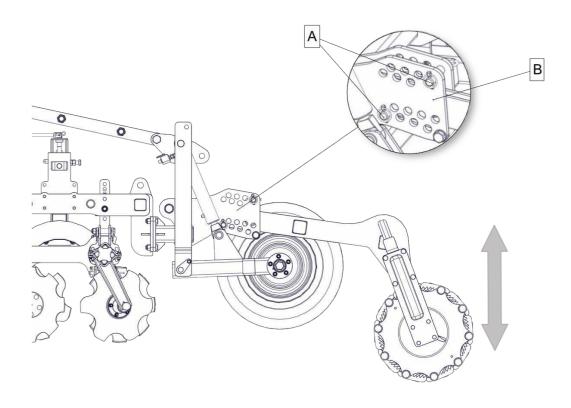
Working depth adjustment on the roller - KOS PREMIUM LONG
